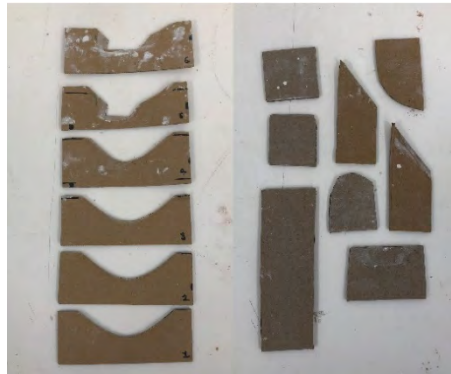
(left) Initial support shapes used, cut from 3mm cardboard to fit the exact shape of the print model; (right) Standardized support shapes cut from 3mm cardboard.
